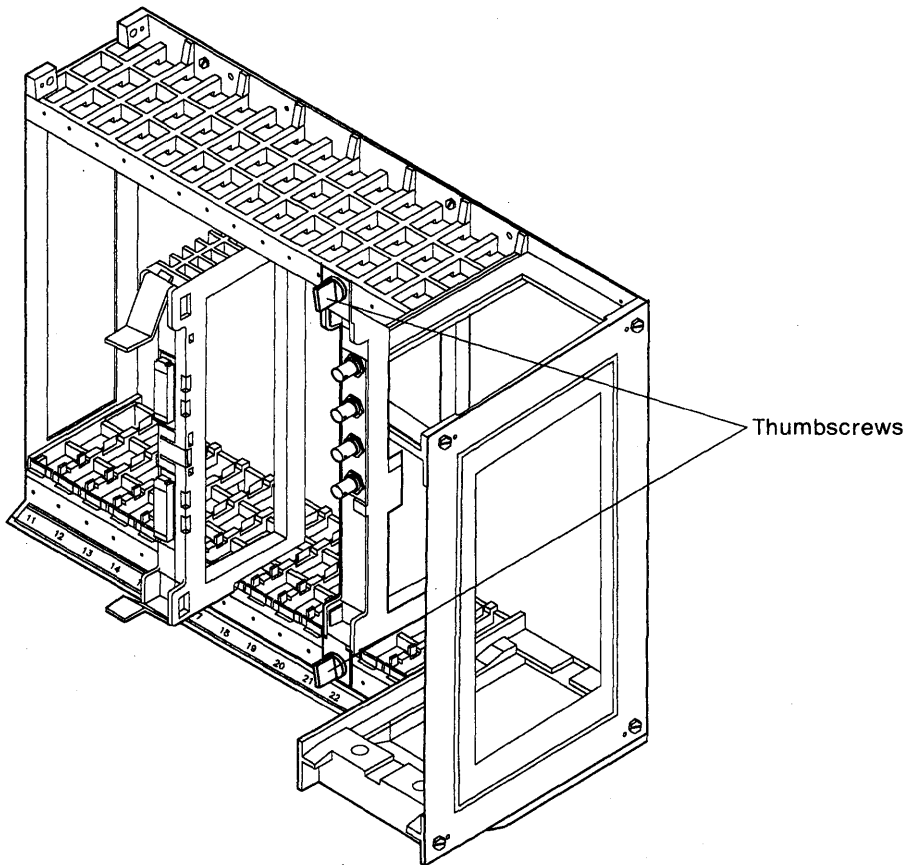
Card Removal/Replacement (Thumbscrews)
